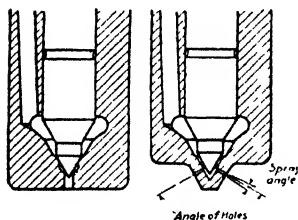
Showing (left) Single Hole Nozzle and (right) Multiple Hole Nozzle.
